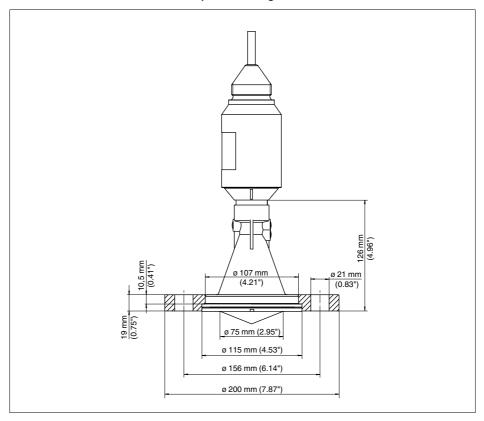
VEGAPULS WL 61 - compression flange DN 80/3"/JIS80
